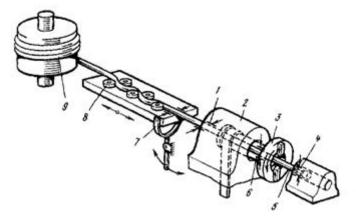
Scheme of a cutting-edge automatic machine for the manufacture of parts from the bay
